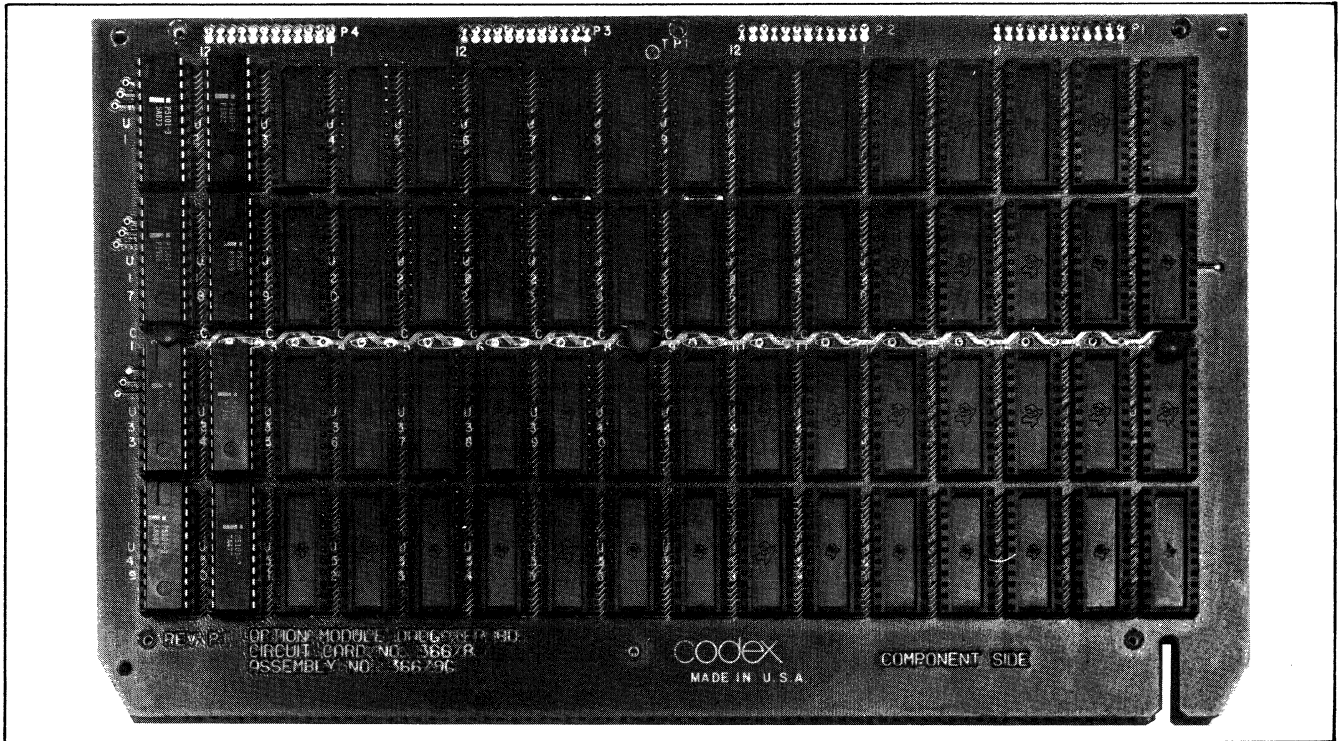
C. Printed Circuit Option Module (Daughter Card)
